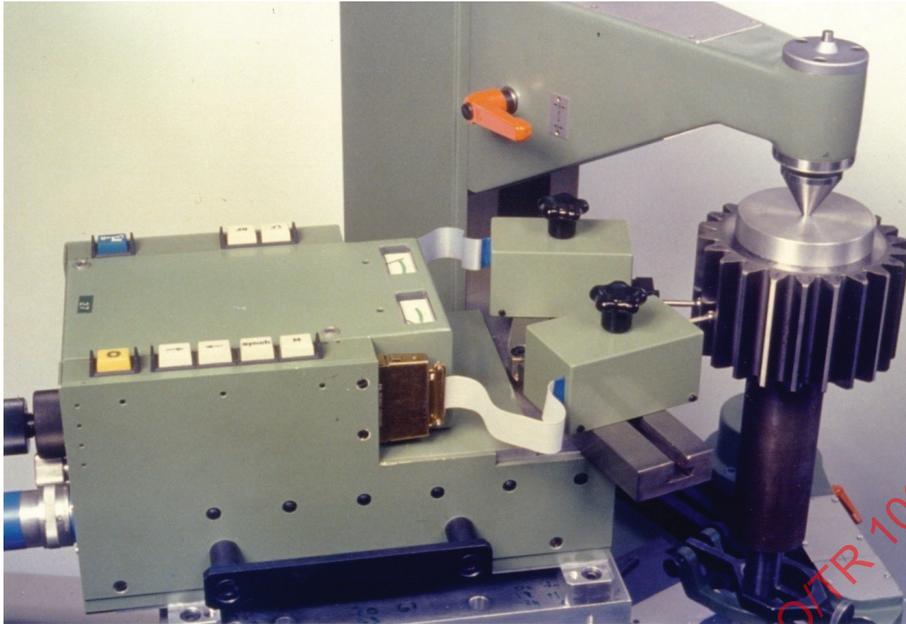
In-process measurement with a CNC measuring station mounted on a grinding machine
